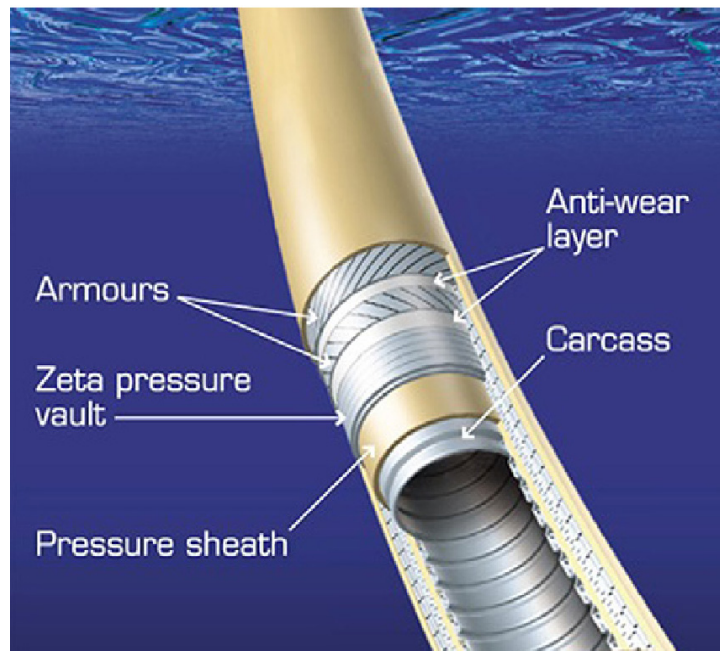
2 Typical cross section of flexible riser (Bai and Bai, 2010)
